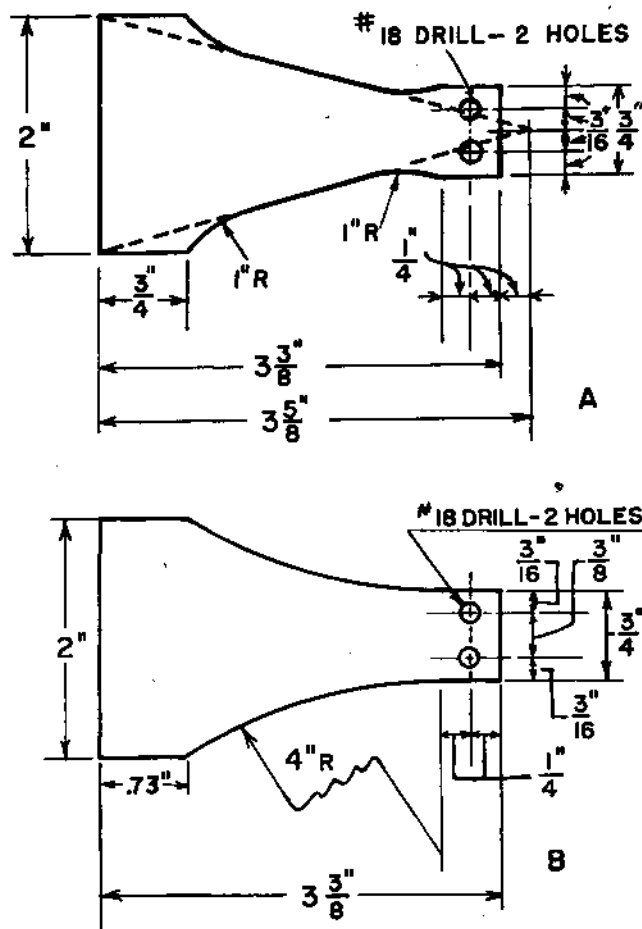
Types of specimen used for bending fatigue tests on sheet materials.
